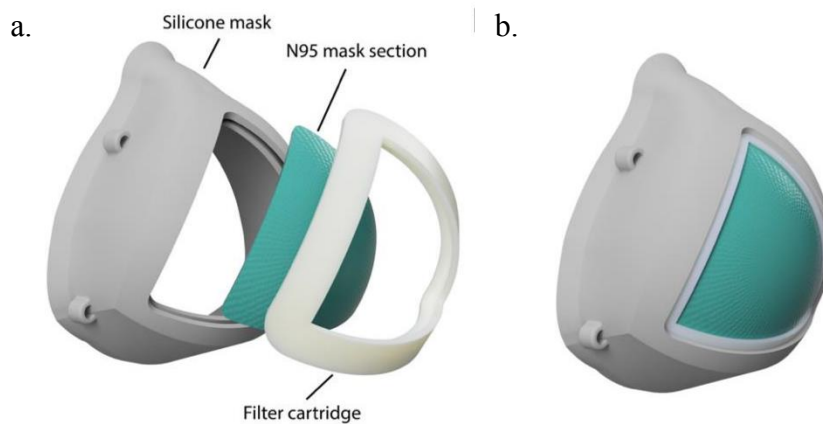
Application of SIL 30 additively manufacturable silicone. (a) Exploded view of COVID-19 customizable N95 mask with silicone seal and (b) assembled mask [75].
